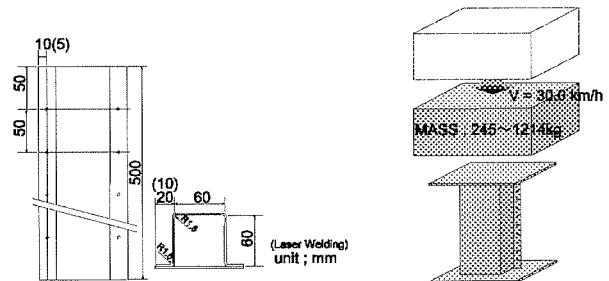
Dimensions of member models Fig. 2 Test condition for axial crush
